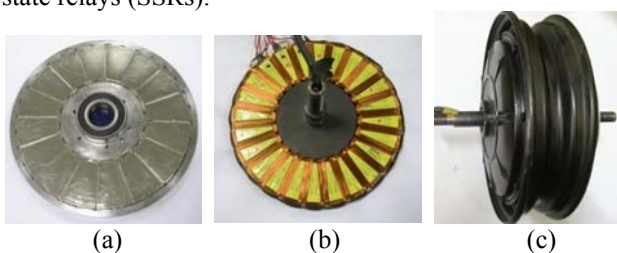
Prototyped AFPM motor with dual-wye windings: (a) rotor, (b) stator, and (c) direct drive hub motor assembly
